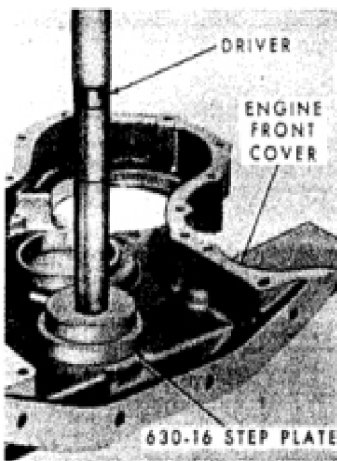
Installing the crankshaft front oil seal in engine timing gear cover.
